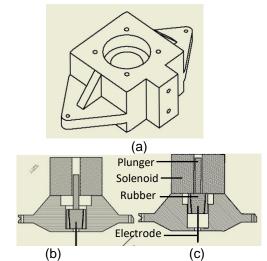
a) 3D printed part, b) Down position, and c) Up position
